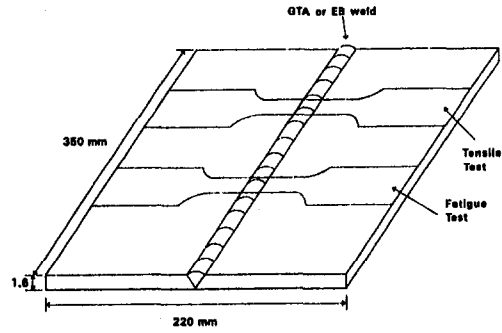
Weld joint showing areas for tensile and fatigue investigation
